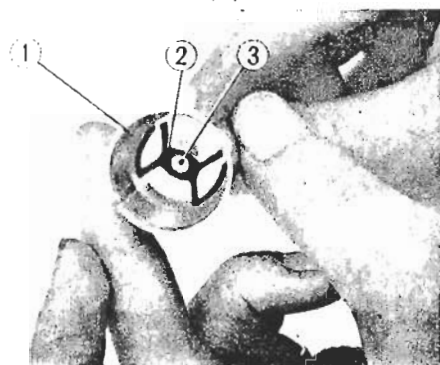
(1) Throttle valve (2) Needle set plate
